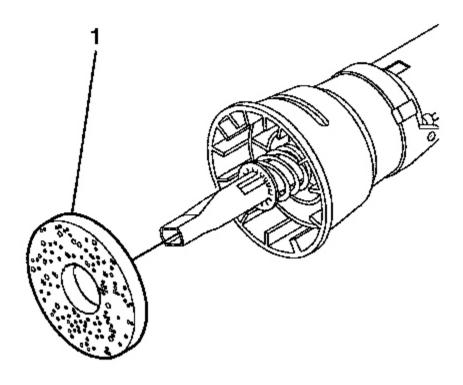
Telescope Motor Assembly & Steering Shaft Seal Courtesy of GENERAL MOTORS CORP.
